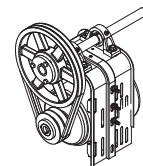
Drive Package Diagram for 20 - 42" Propeller Diameter
